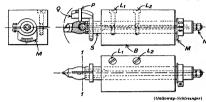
ADJUSTABLE DIAMOND TOOL-HOLDER
